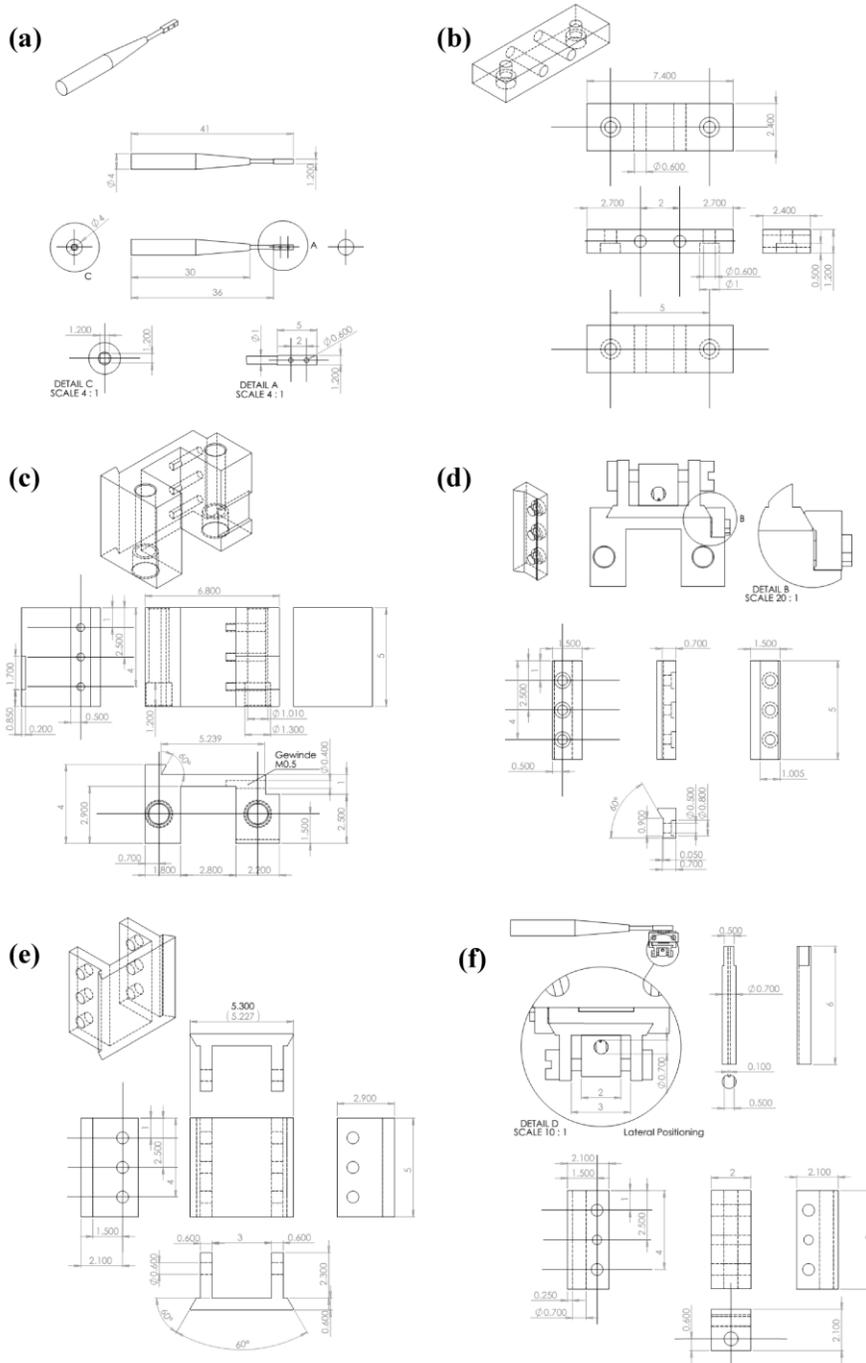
Figure A. Machine drawings (a) microdrive holder (b) mount (c) shuttle (d) shuttle clamp (e) carrier (f) probe holder.
